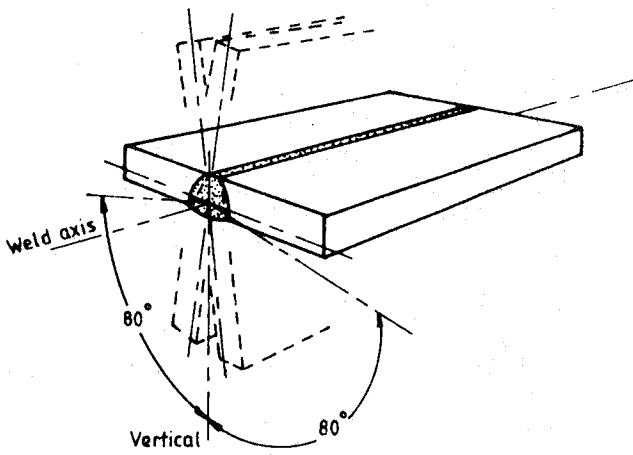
Universal position diagram for groove welds in space
